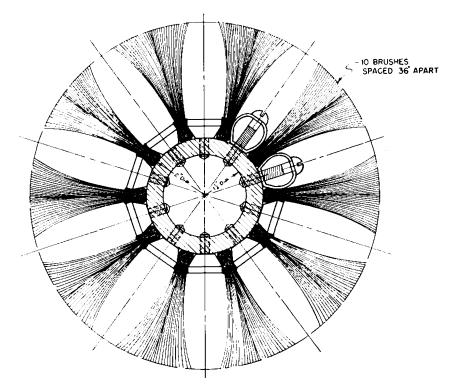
Section showing details of the stripping brush of the Oklahoma experimental brush-type cotton stripper.
